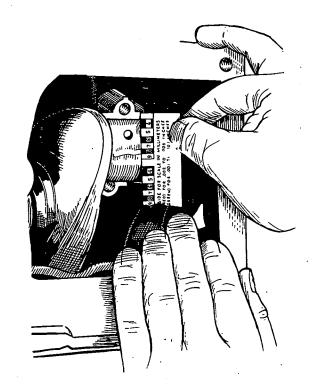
MEASURING BEARING CLEARANCE WITH PLASTIGAUGE
